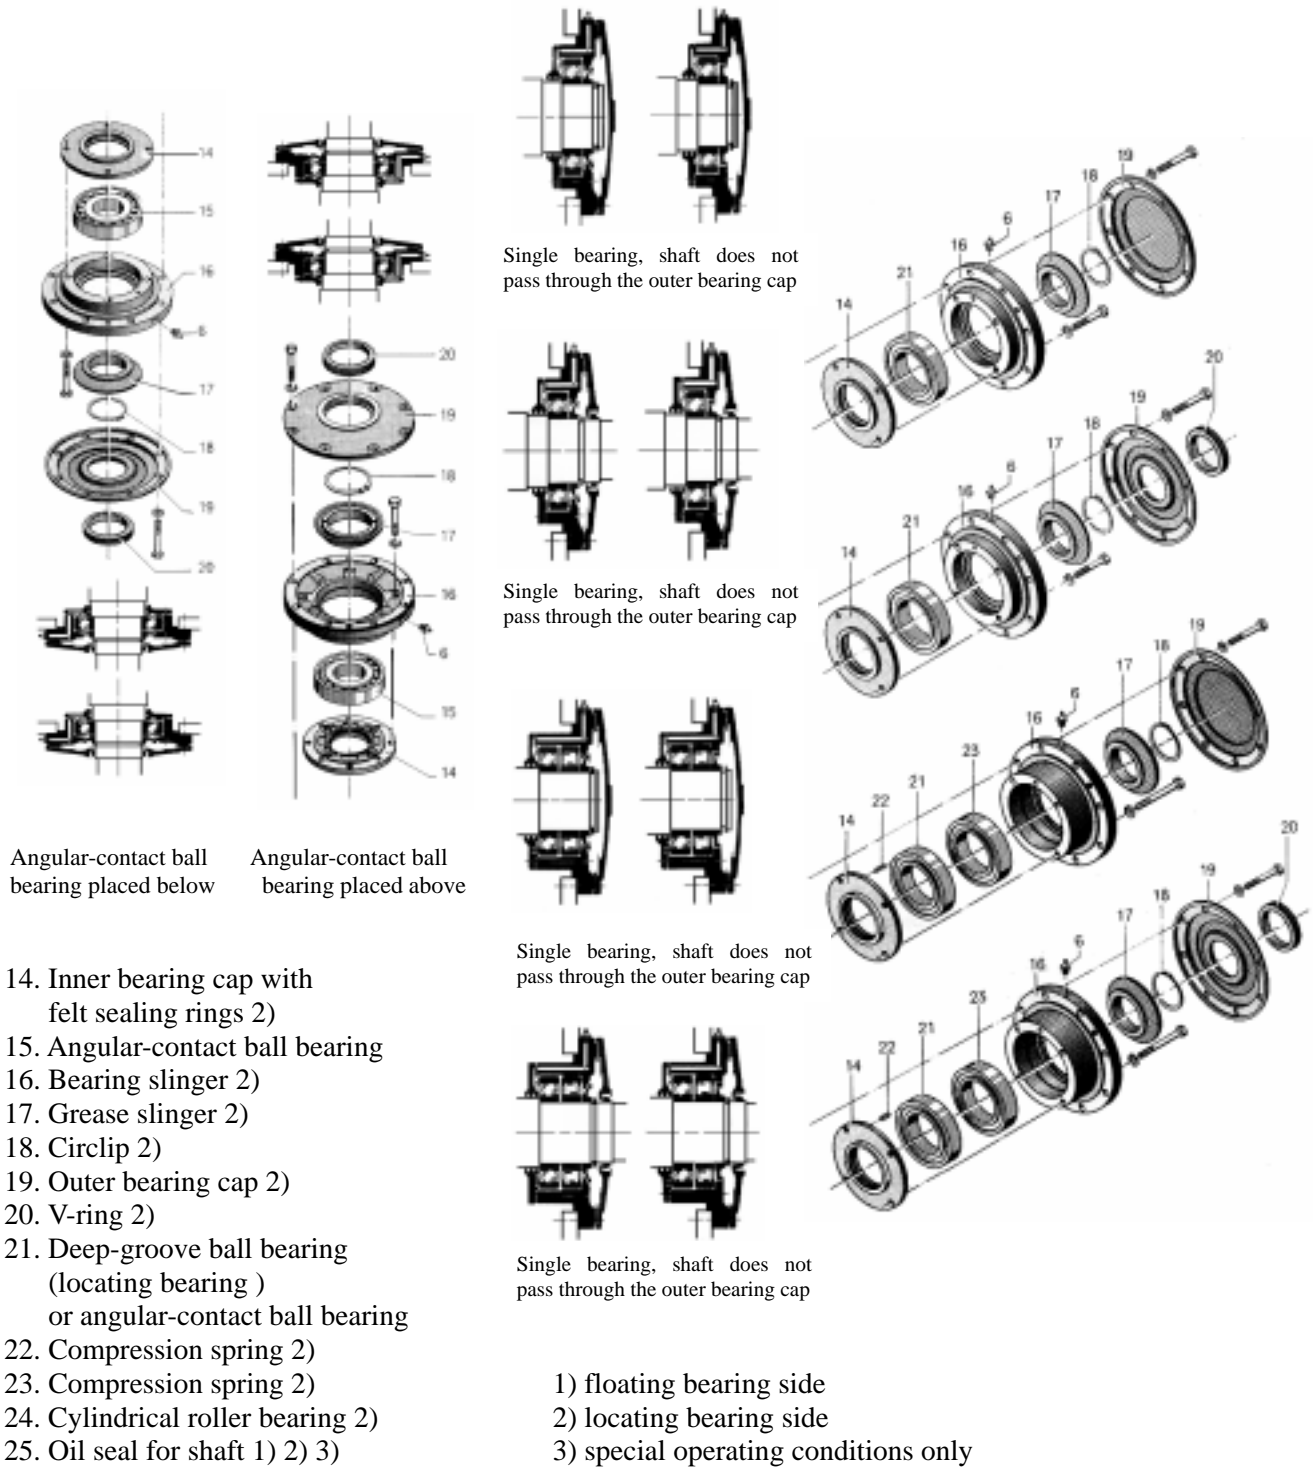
Locating bearings (examples, delivered design may deviate in details)
